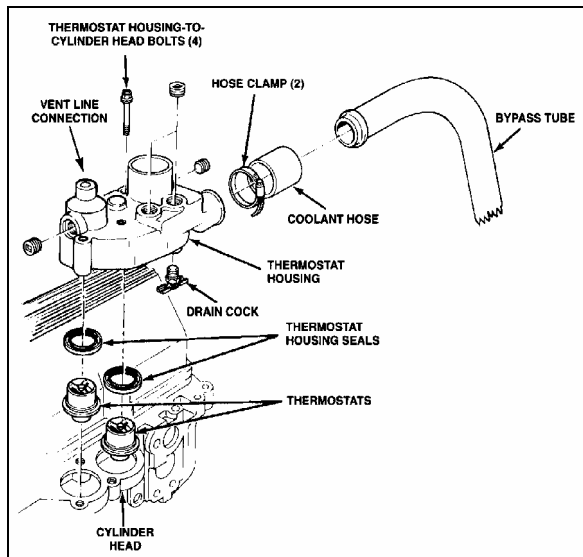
THERMOSTAT AND RELATED PARTS 05034
